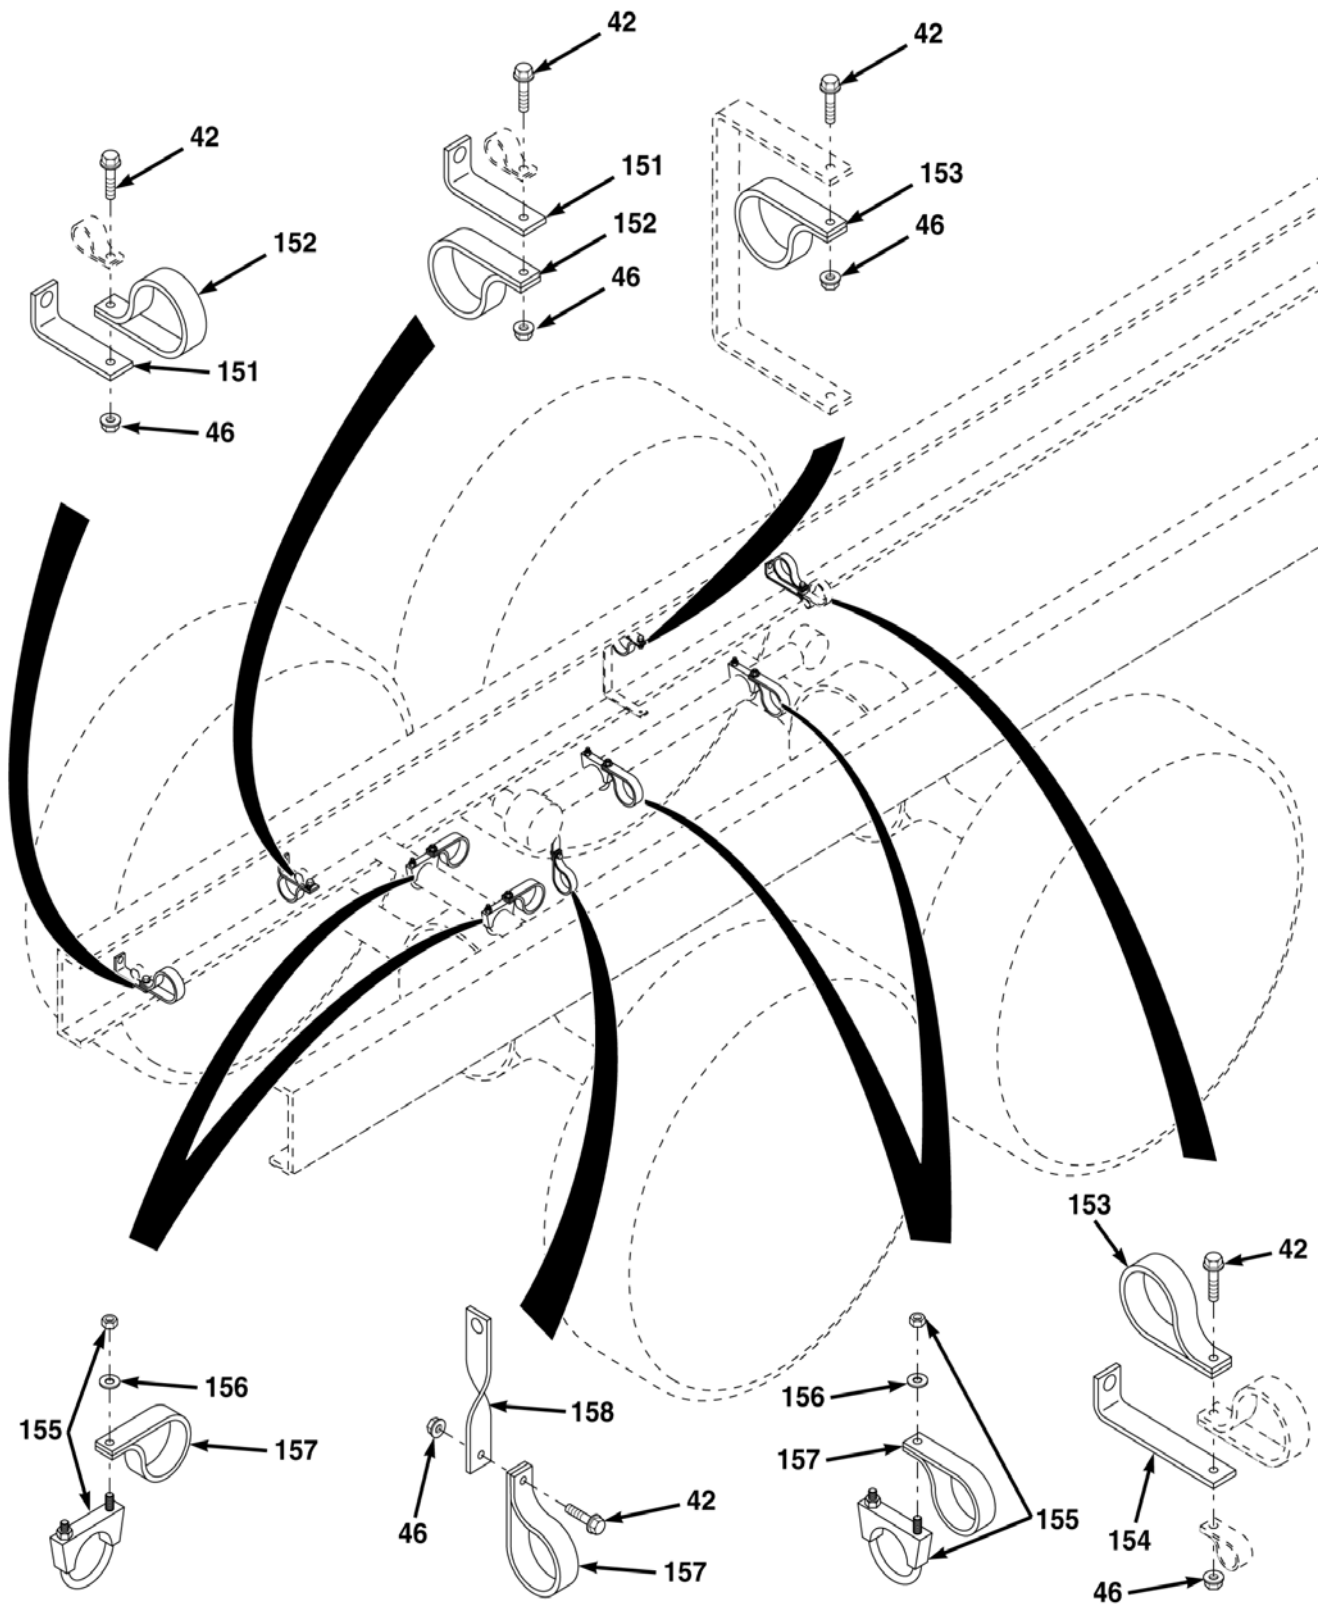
CHASSIS AIR (SHEET 10 OF 15)
